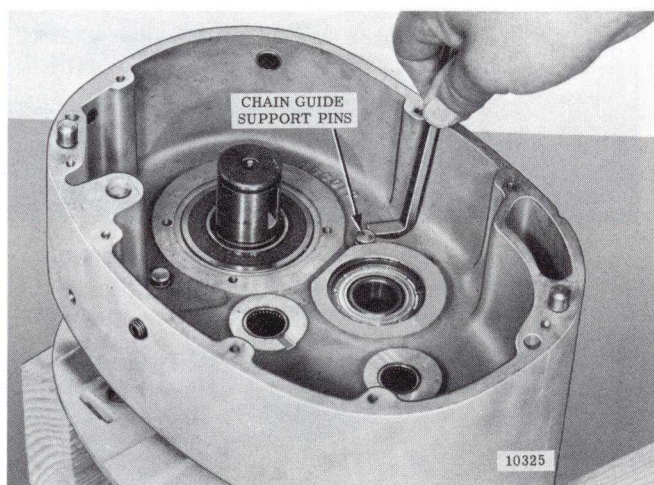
Removing Chain Guide Support Pins Using Pry Bar.
